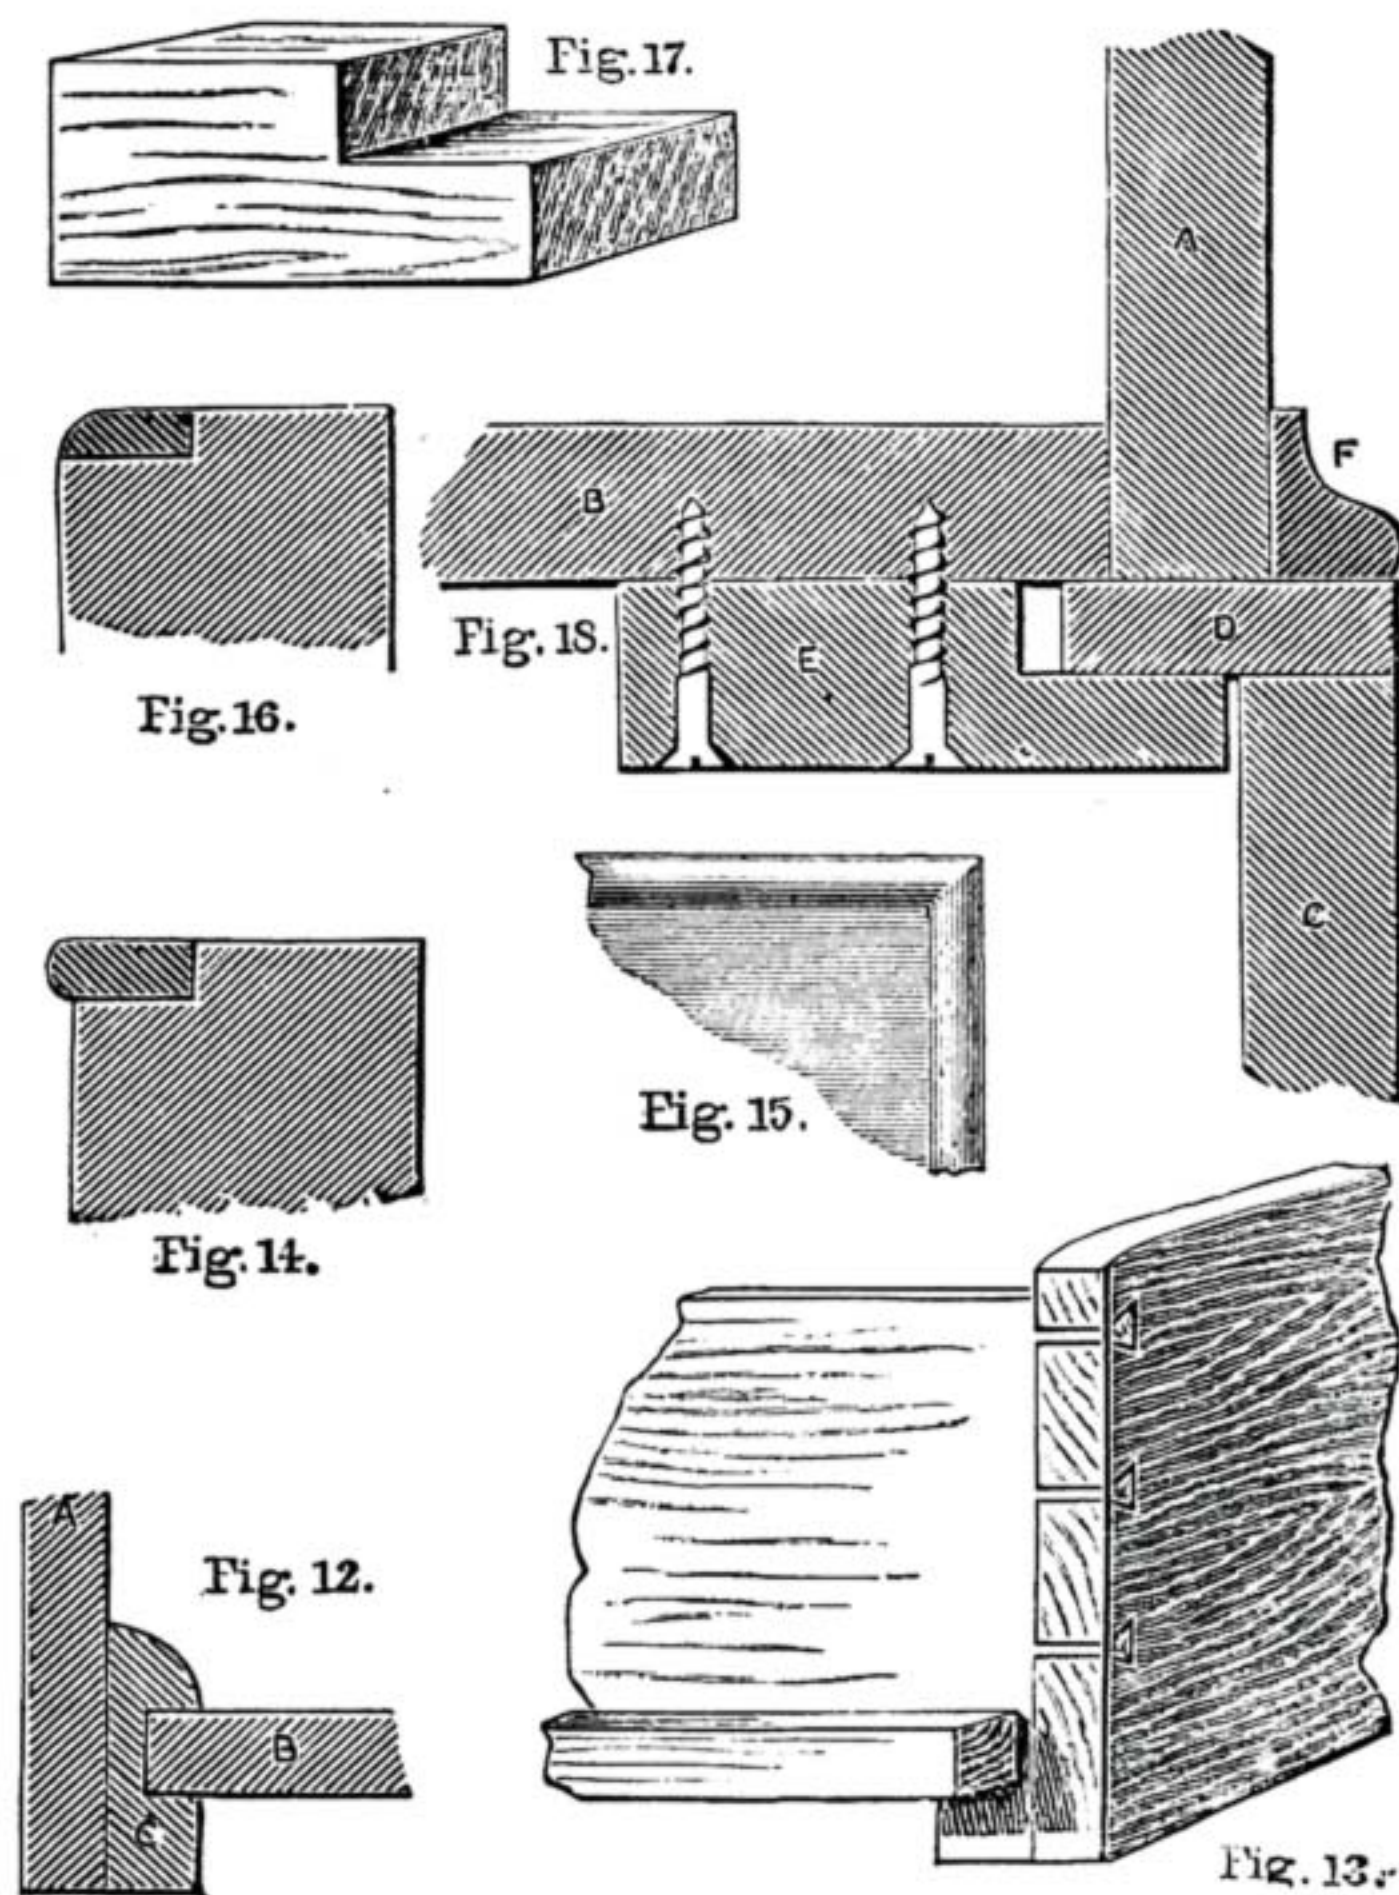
Fitting of Drawer Bottom. Fig. 13.—Back of Drawer. Figs. 14, 15, 16.—Beadings for Drawer Fronts. Fig. 17.—Cleat. Fig. 18.—Section of Plinth Fastening.
